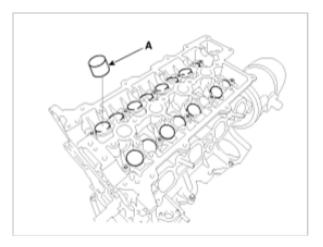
Identifying Mechanical Lash Adjuster Courtesy of HYUNDAI MOTOR AMERICA
